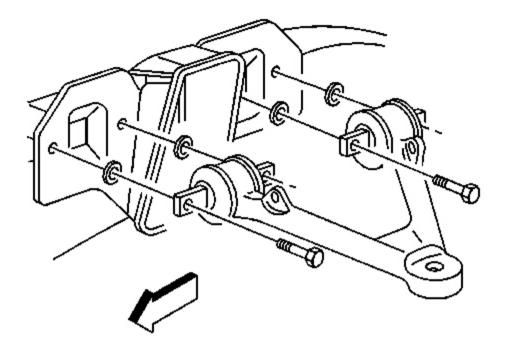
Upper Control Arm, Bolts & Shims Courtesy of GENERAL MOTORS CORP.
